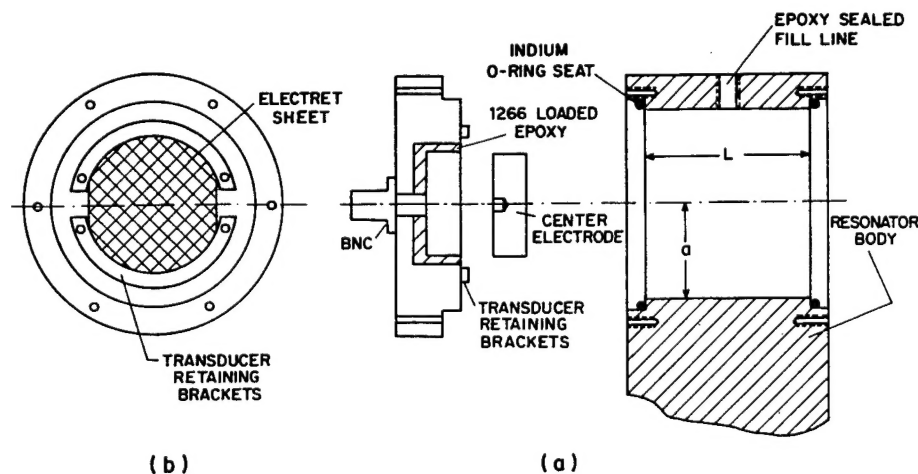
(a) Schematic view of one of the cavities of the double resonator machined out of a single Al block. (b) Transducer clamping arrangement to reduce trapping of gas. All screws have vent holes.
